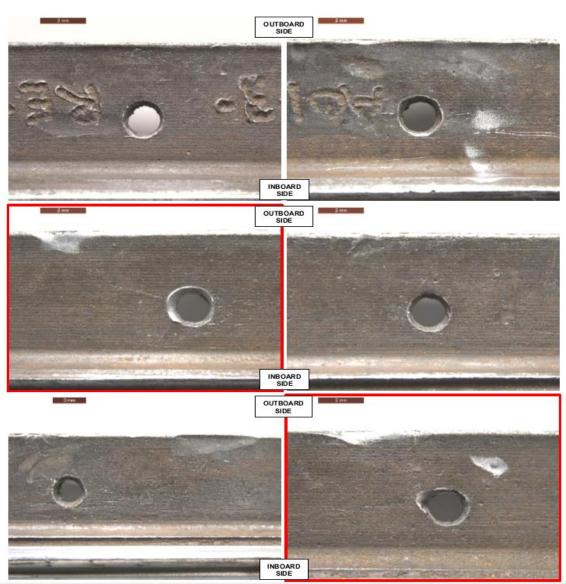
Details of the outboard locking nut holes for fixing the locking wires, observed from the outer side. All holes edges and the corresponding areas of the nut outboard edge are worn, indicating they have been used in the various tail rotor installations. All the worn areas are brown in color due to the generalized oxidation, with the exception of two holes (red rectangles), which were probably used in the last installation.
